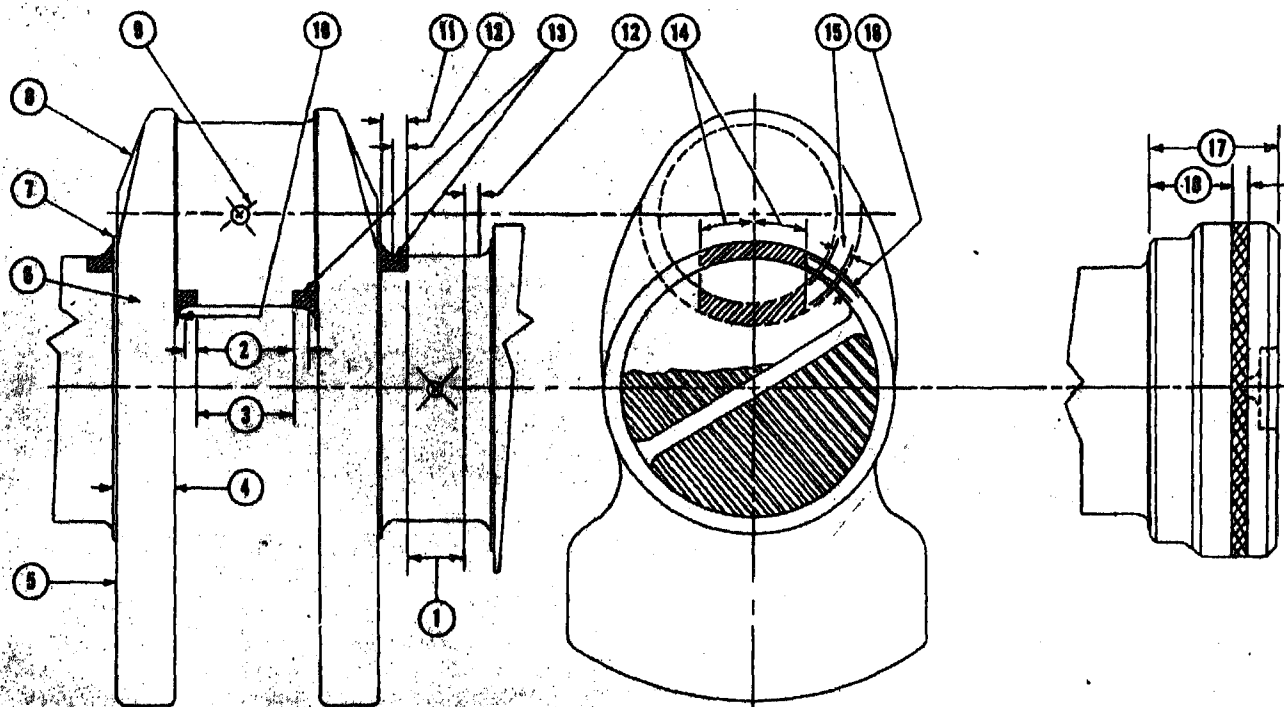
Crankshaft magnetic inspection
